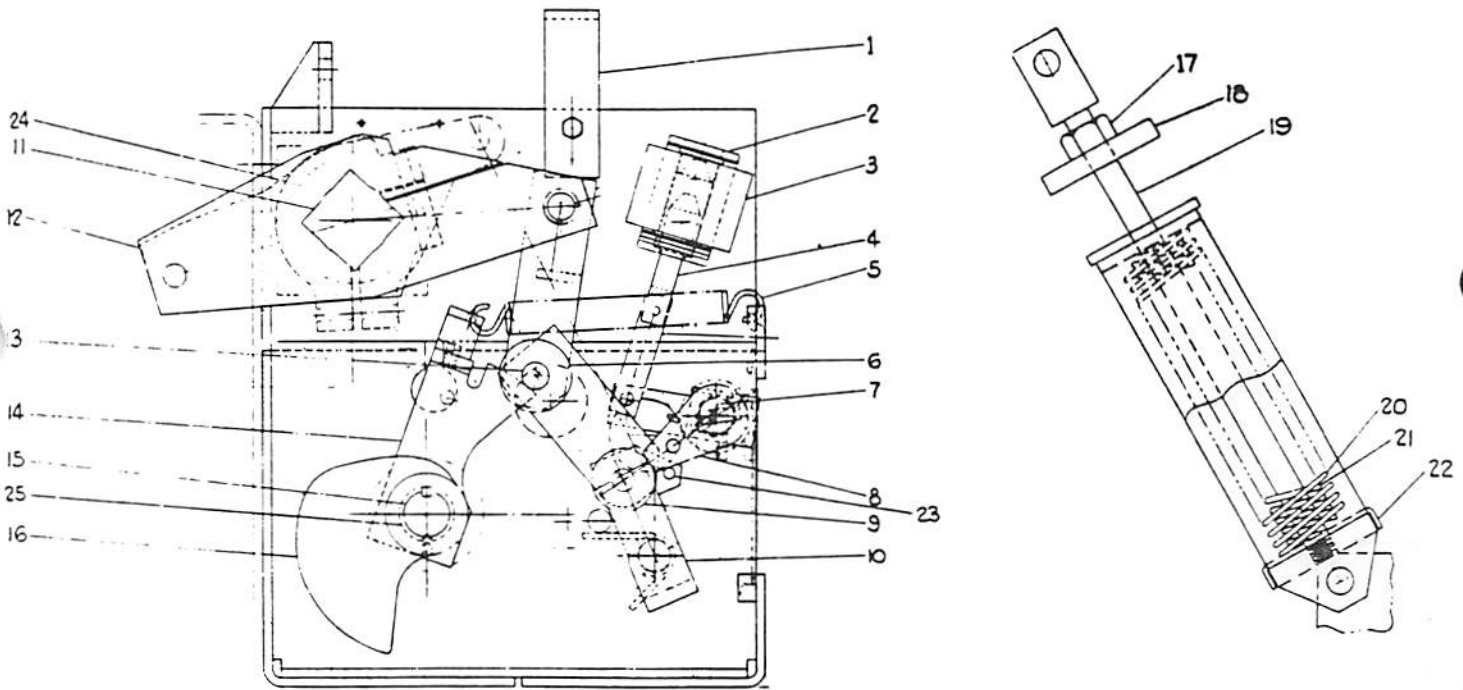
(0114C5320) Sectional Side View of Mechanism
